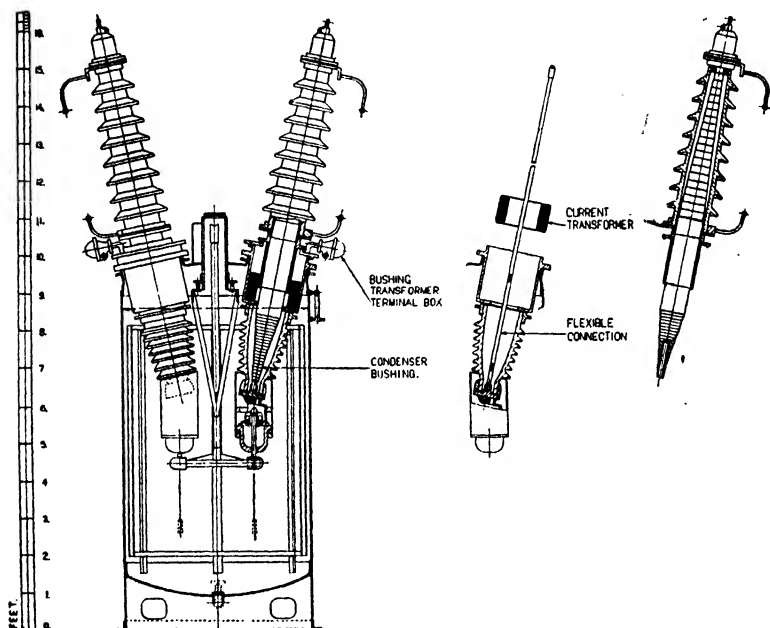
METHOD OF REMOVING A CONDENSER BUSHING FROM AN OIL CIRCUIT-BREAKER
